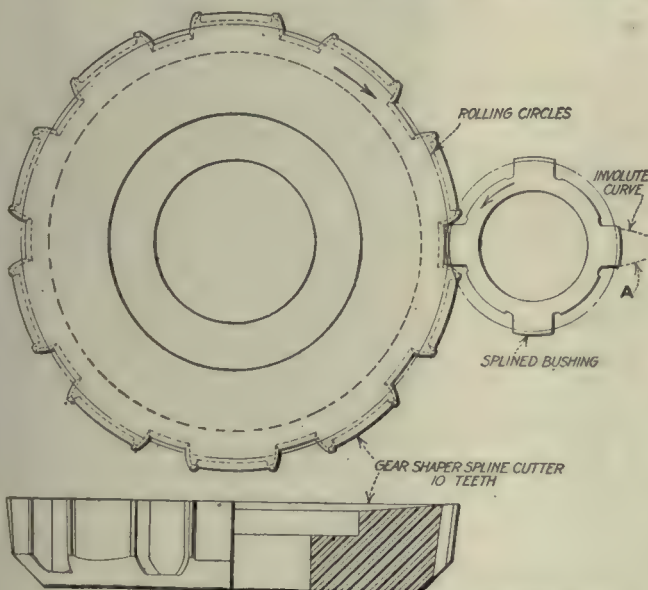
DIAGRAM OF CUTTER AND BUSHING
